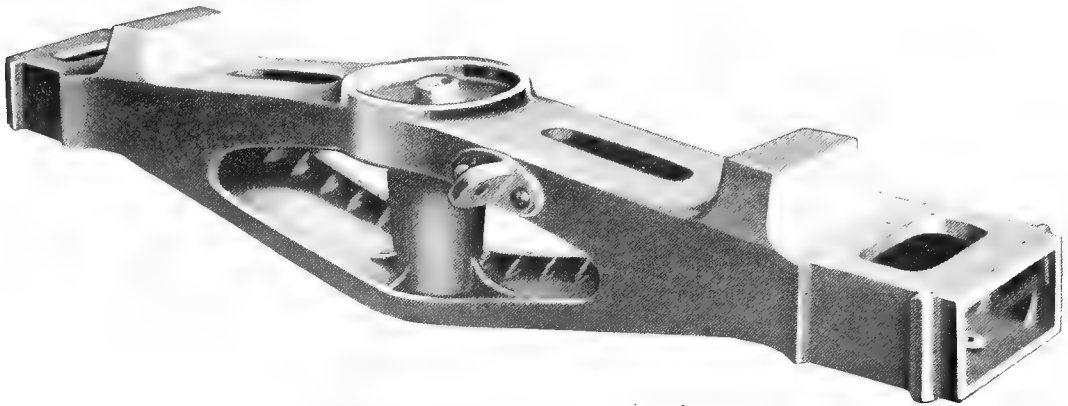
Buckeye Cast Steel Truck Bolster for Freight Cars. Buckeye Steel Castings Company.
